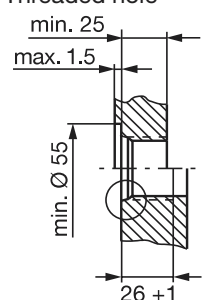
Threaded hole for mounting the BTL with O-ring
